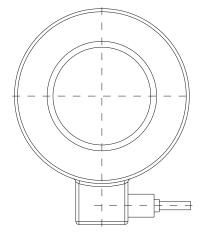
SIWAREX WL270 CP-S SC dimension drawing
